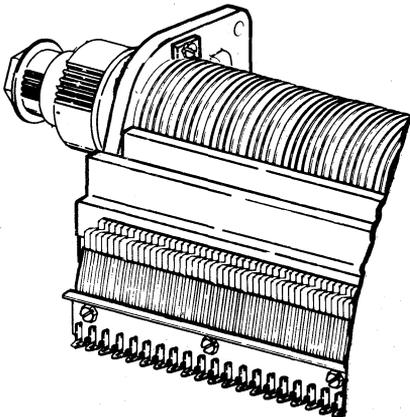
Print Head Assembly (Tractor Feed - 132-Column) (Early Design)
